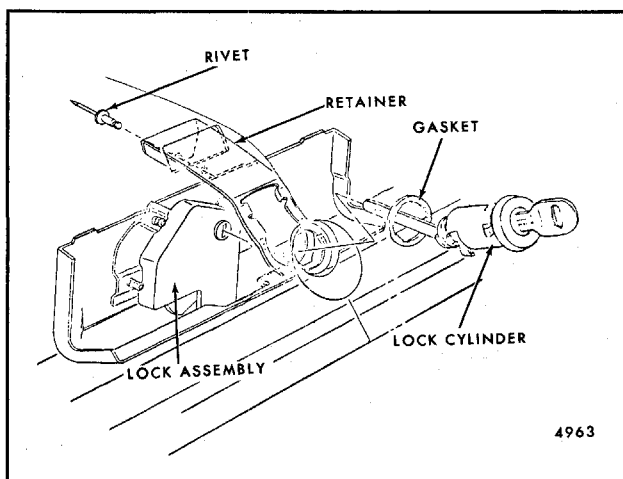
Typical Top Loading Lock Cylinder Retainer - Chevrolet "A" Style Shown
